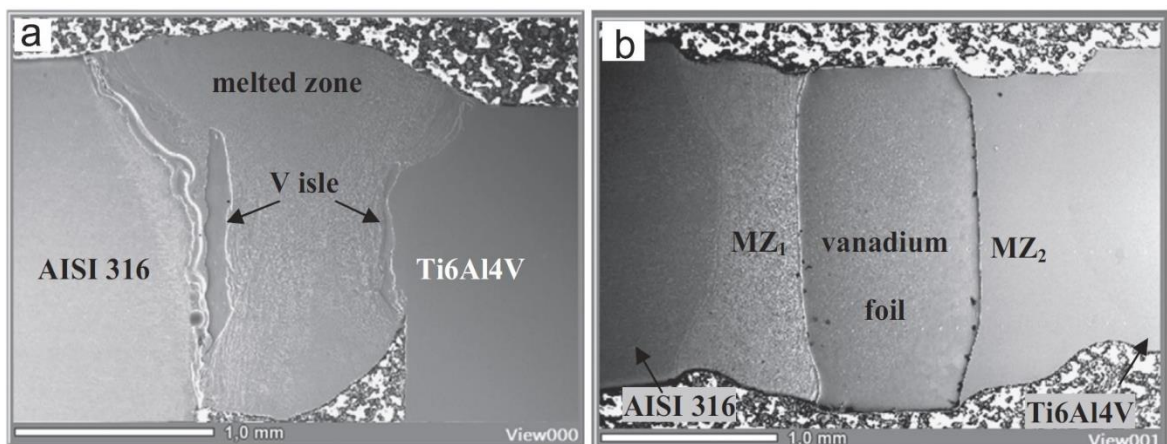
Shows the morphology of a Ti-6Al-4V / 304L stainless steel joint produced by LBW using pure vanadium alloy as a filler metal and (a) a joint made with single-pass beam and (b) a joint made with double pass laser beam[108].
